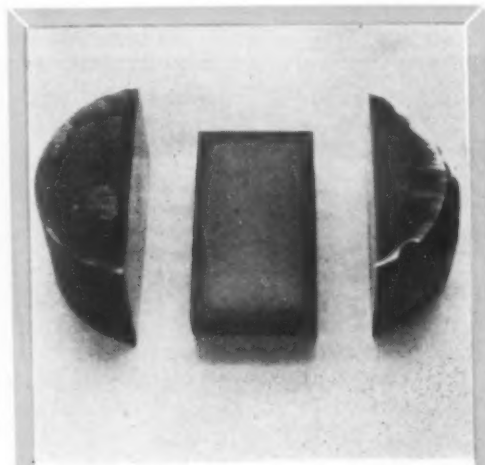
Test blocks are carburized with each batch of bearing parts. During cycle, block is removed, given short cycle hardening. After splitting, center section is used to check case.
